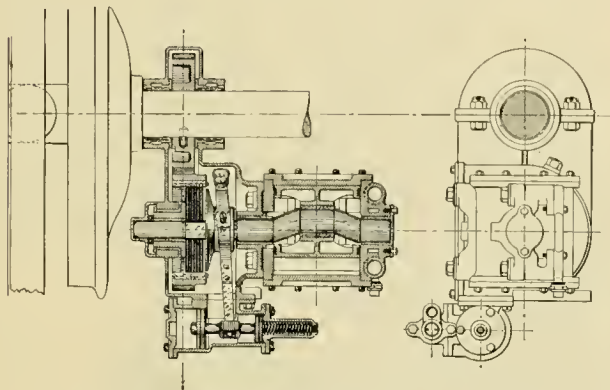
SECTION AND SIDE ELEVATION OF PUMP.
